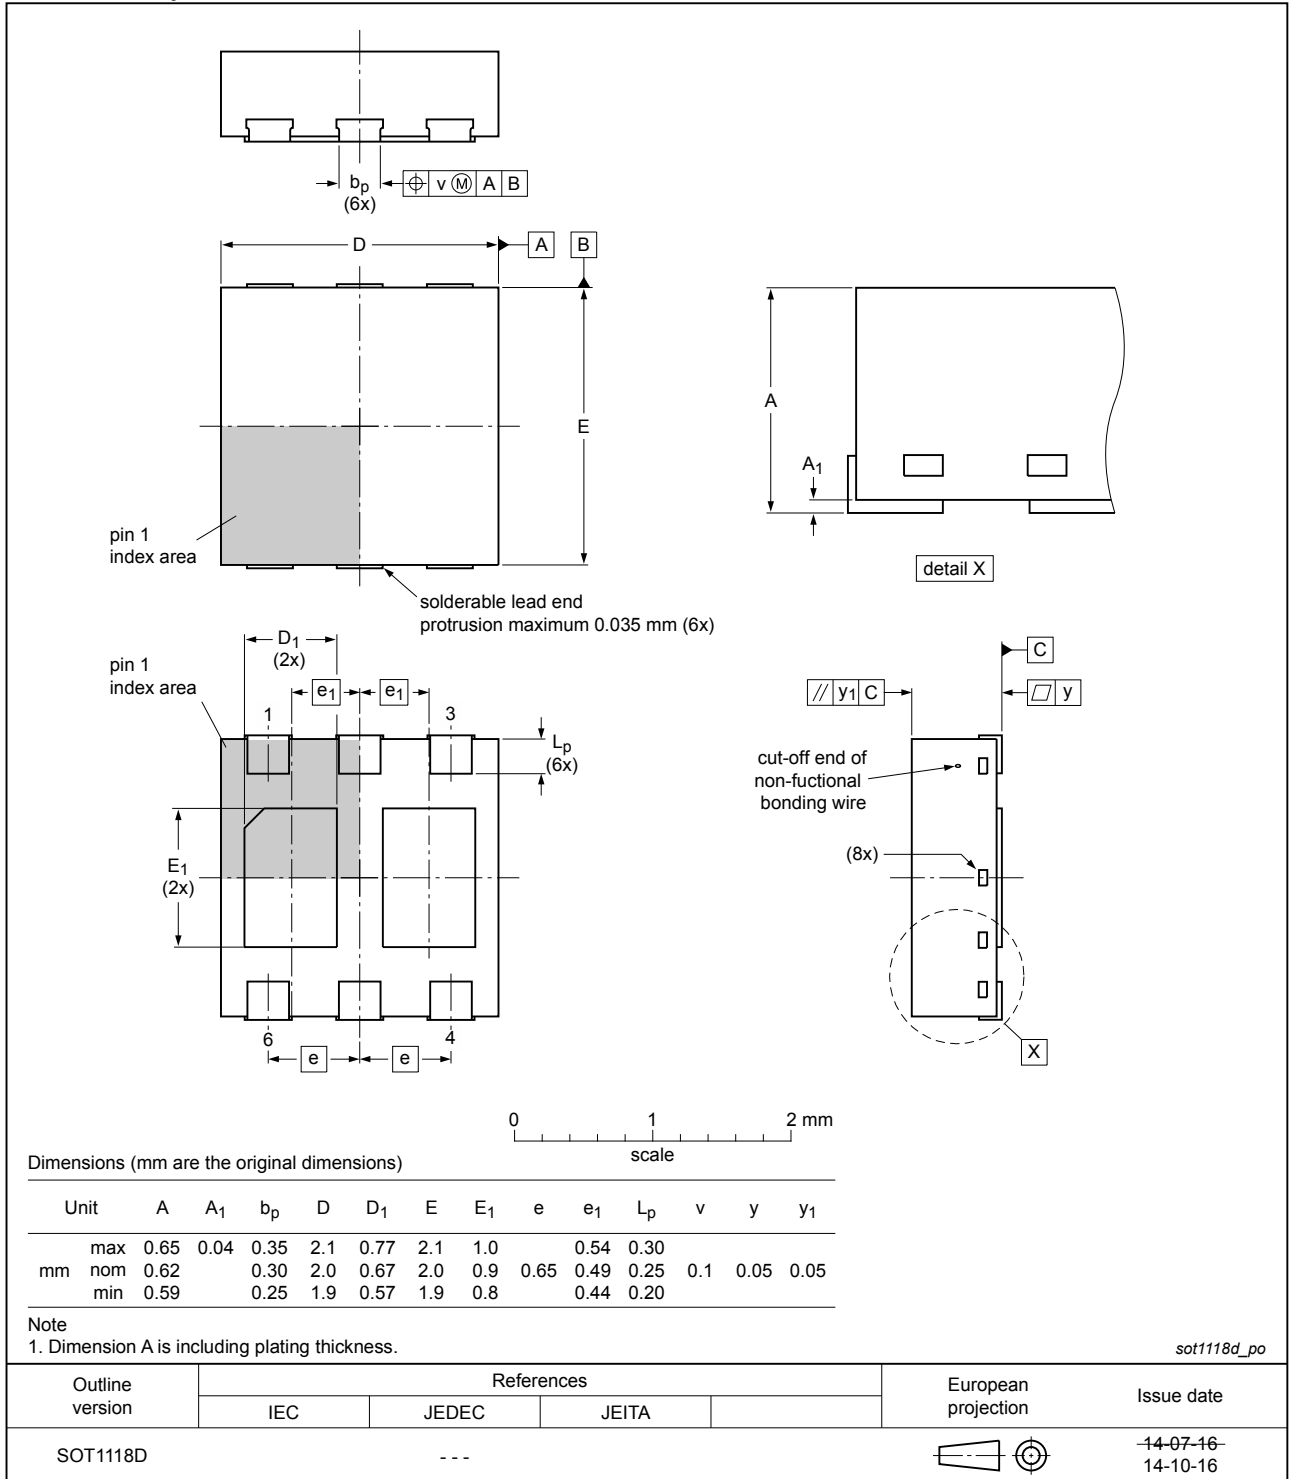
Package outline DFN2020D-6 (SOT1118D)
